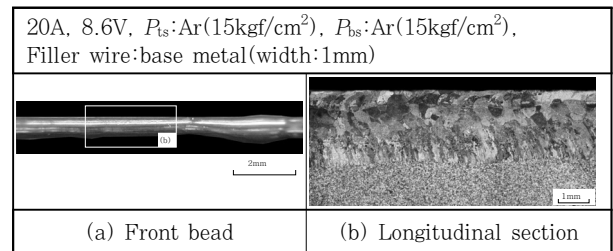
Front bead and longitudinal section of GTA welds
